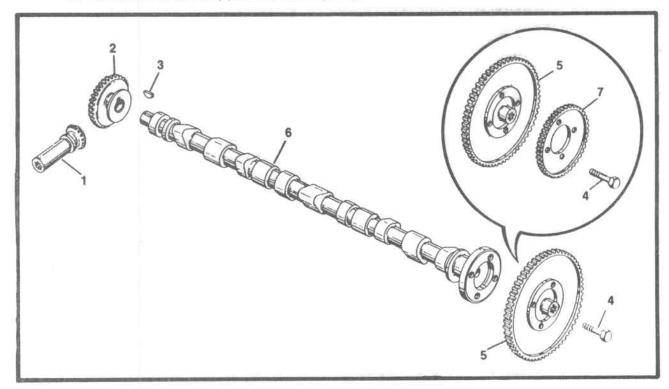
CAMSHAFT ASSEMBLY.
